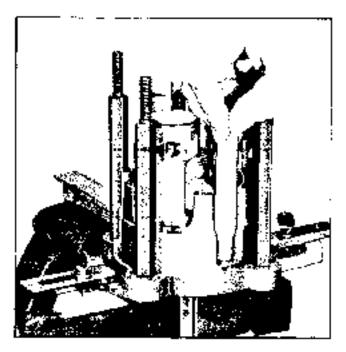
A-27 Installing Service Discharge Crossover Tube.
